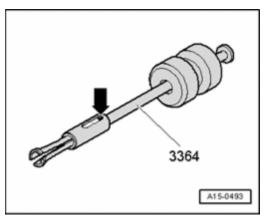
Removing Valve Stem Oil Seals Using Valve Seal Removal Tool 3364 Courtesy of VOLKSWAGEN UNITED STATES, INC.
